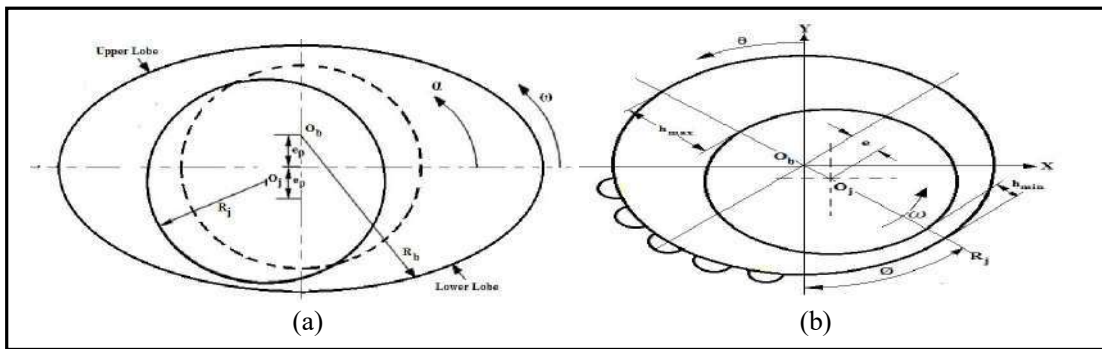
(a) Depicts the Geometry of Smooth Two-Lobe Journal Bearing, (b) Textured Two-Lobe Journal Bearing
